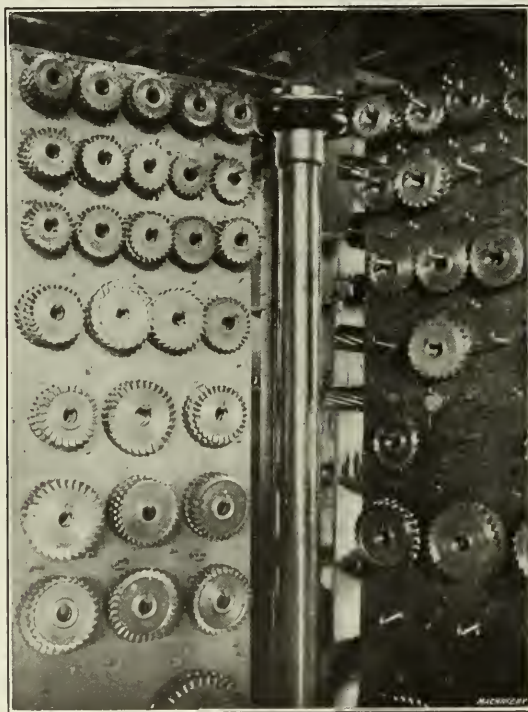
Swinging-leaf Type of Milling Cutter Rack
